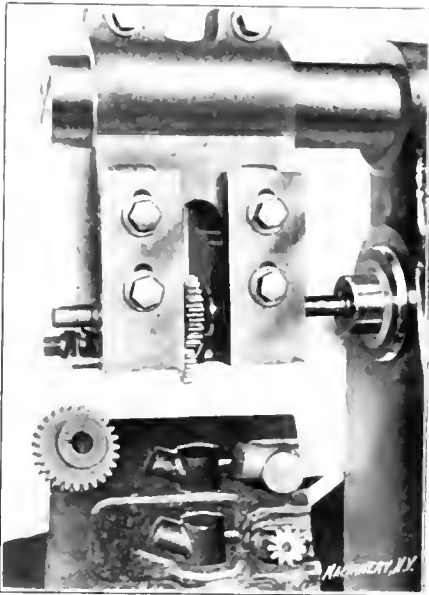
Attachment for Milling Drop-forged Dies and Example of the Work.
